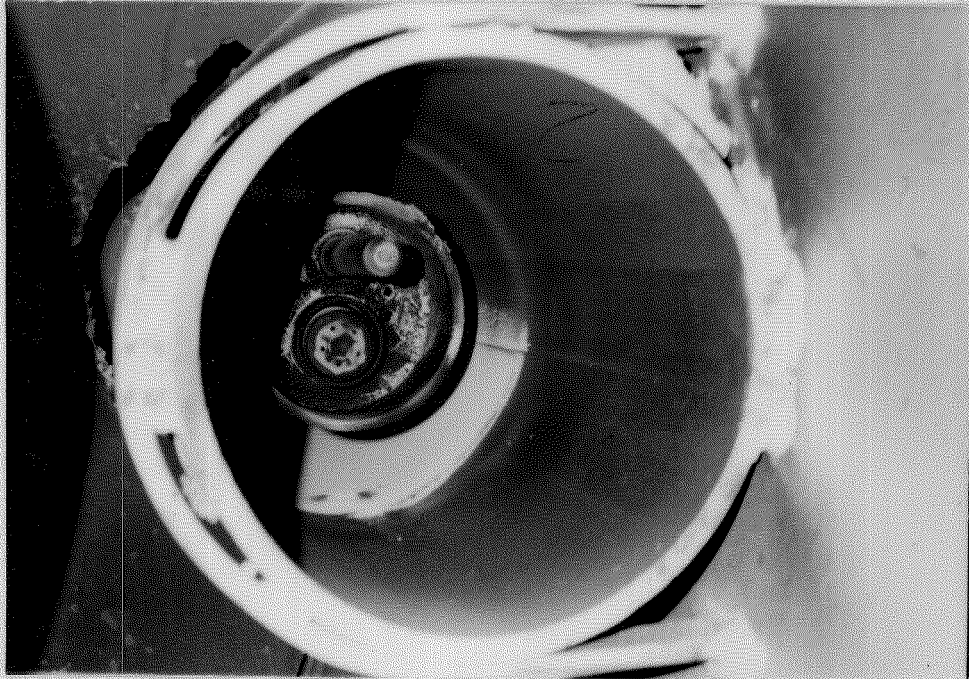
Dirty lighter assembly that has been coked up possibly due to smoky flame.
